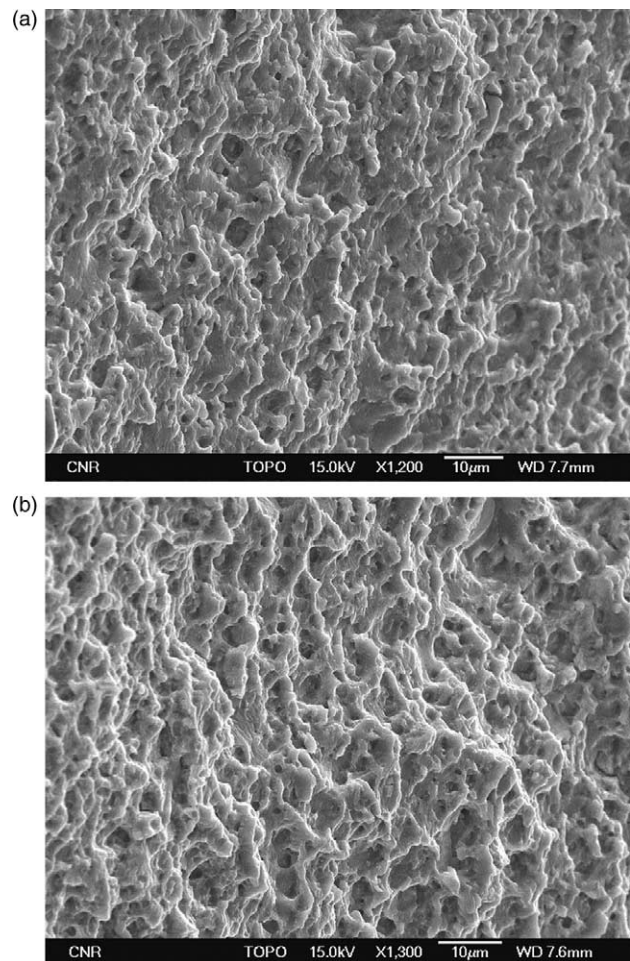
Fracture surfaces of the fatigue specimens broken after 0.4×10^6 (a) and 3×10^6 cycles (b) showing the very fine grain structure of the material and microvoids produced by the process.
